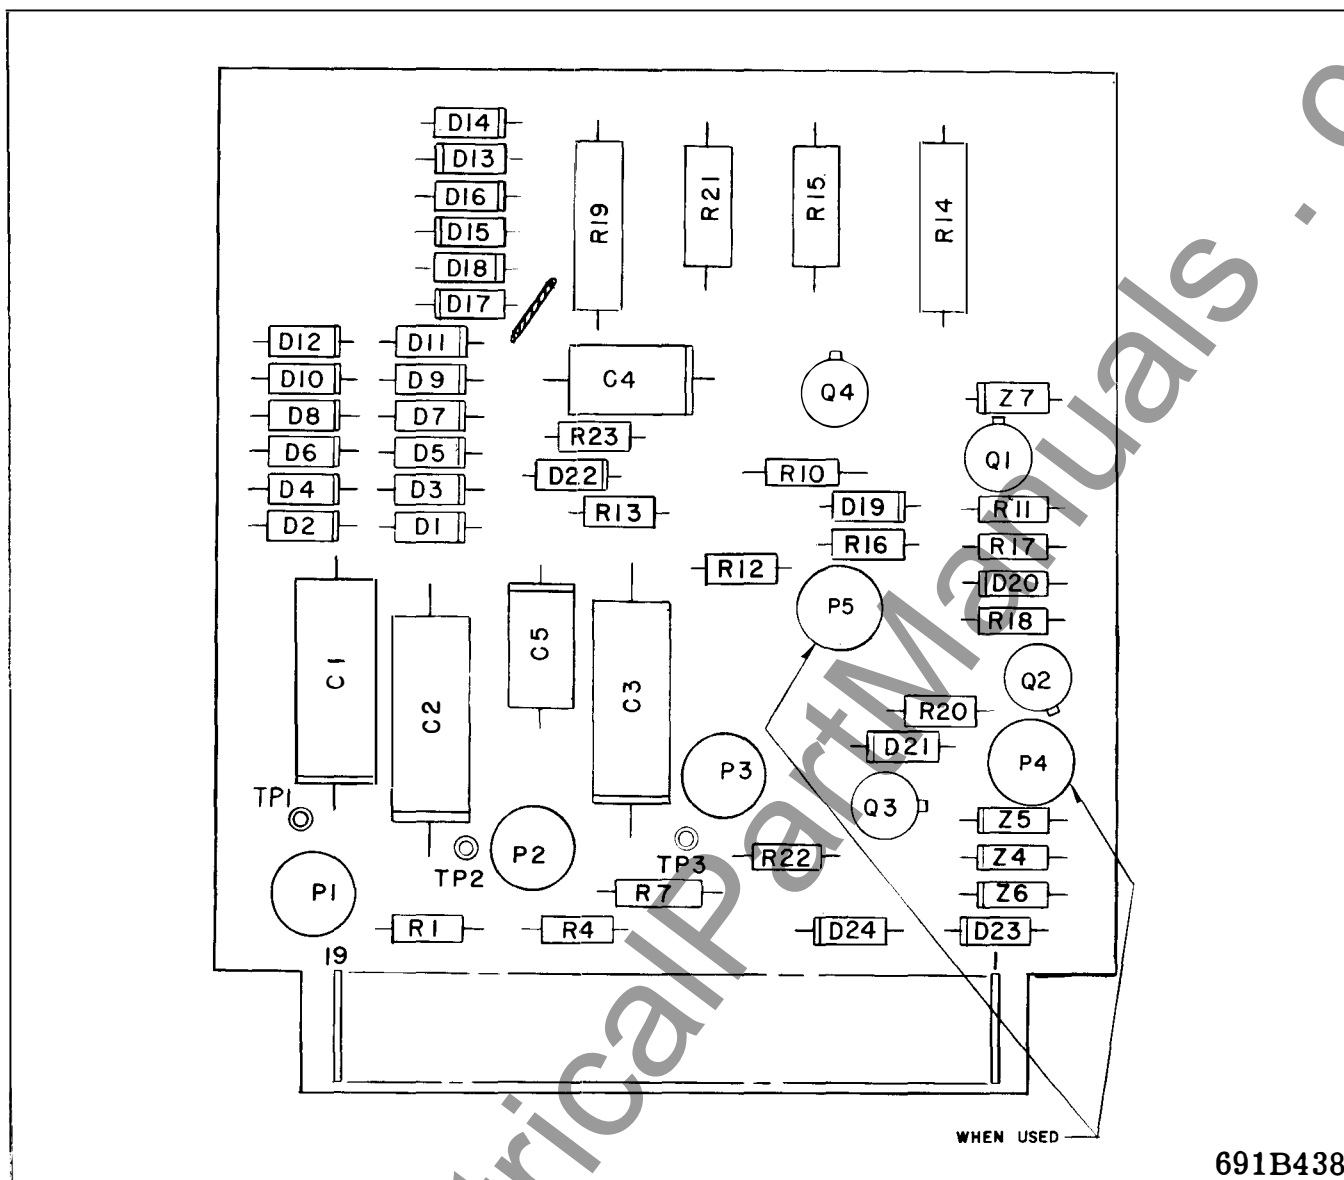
Component location on printed circuit board for the type SI-1 Relay.
